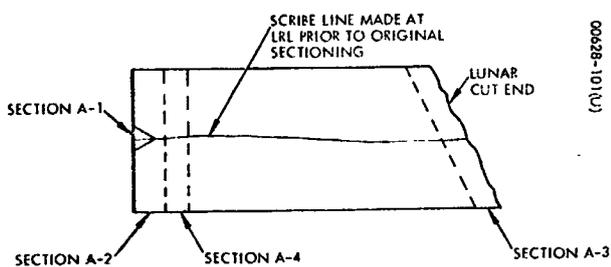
Section A of Polished Aluminum Tube Shown in Figure A-1, Indicating Further Subsections Removed at Hughes
